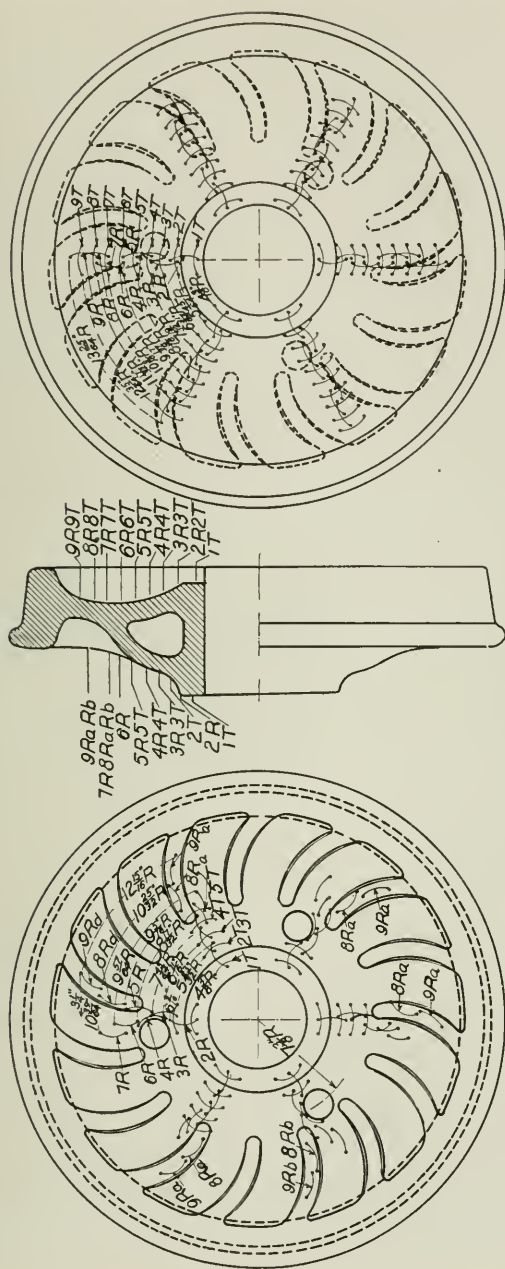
LOCATION OF GAGE-LINES ON 33-IN. 840-LB. ARCH PLATE WHEEL No. 942 805
